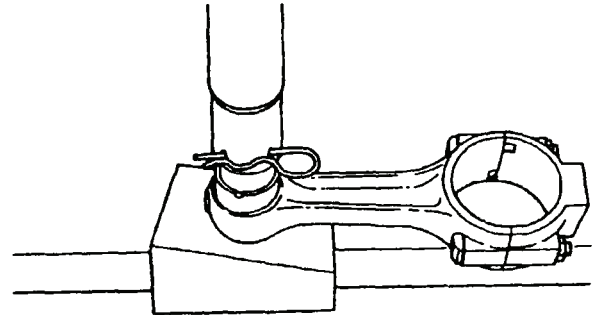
Knock Out Ring, Cup, and Cotter Pin Installation.
